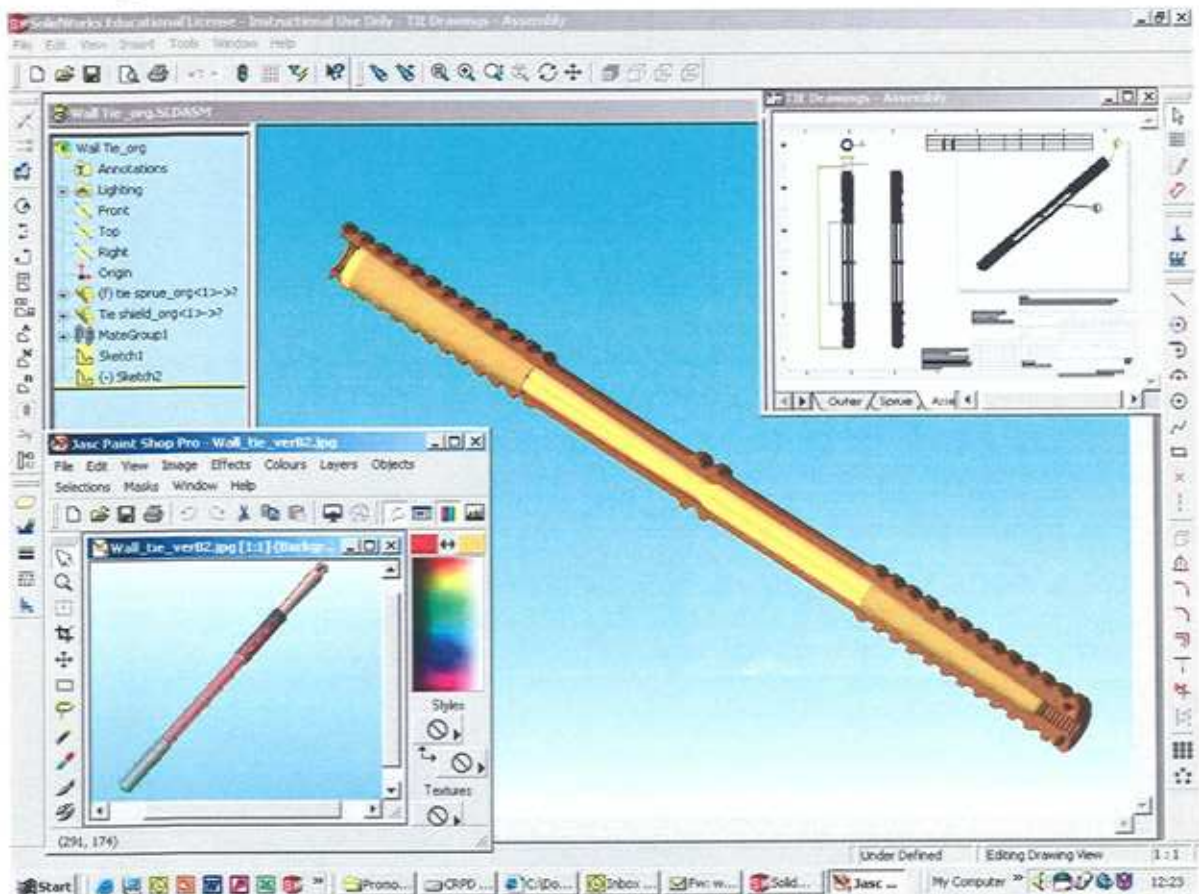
Wall tie drawing, central sprue and detail required for grip
